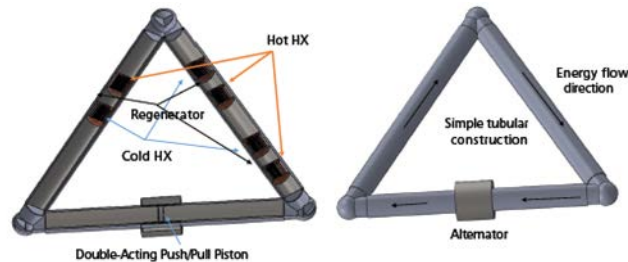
Double-acting Extremely Light-Weight Thermo-Acoustic Engine
